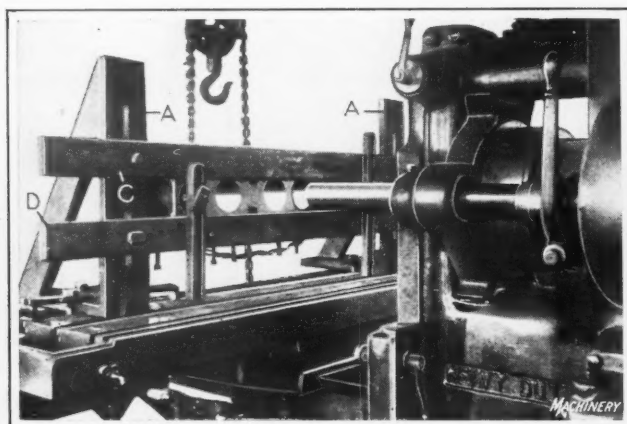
Milling Machine equipped for reboring Automobile Cylinders
